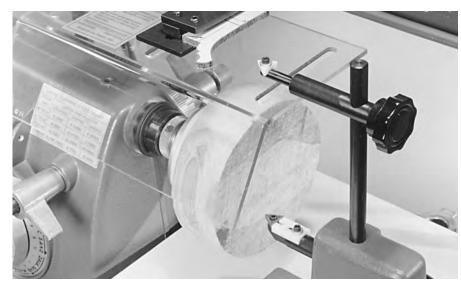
Setup for faceplate turning with the guard extending over the workpiece.
